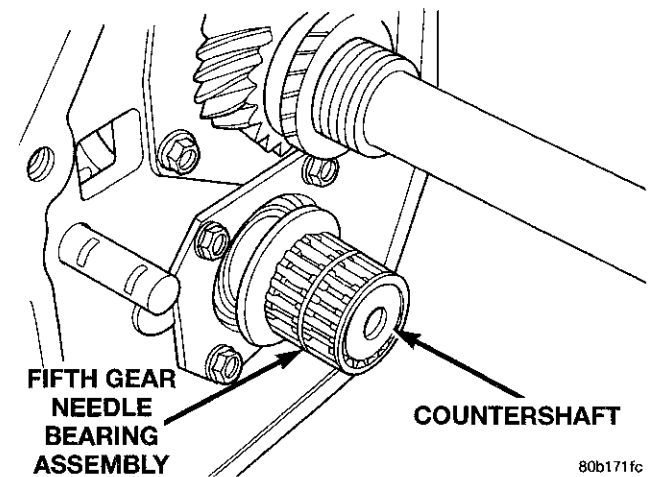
Countershaft Fifth Gear Needle Bearing Removal
